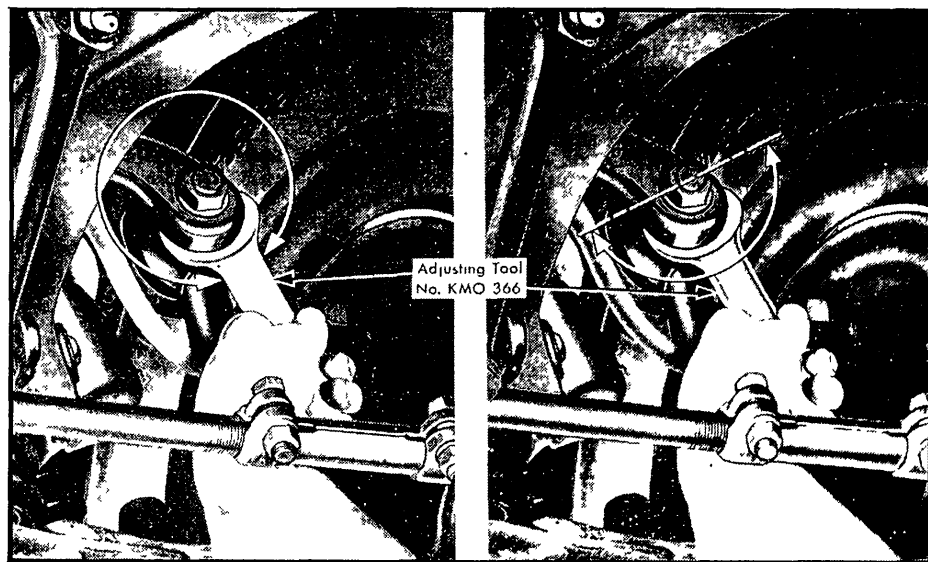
A Caster (left) and camber (right) adjustments, 1950-52. Procedure is the same on previous models except that an eccentric pin is used instead of an eccentric bushing
